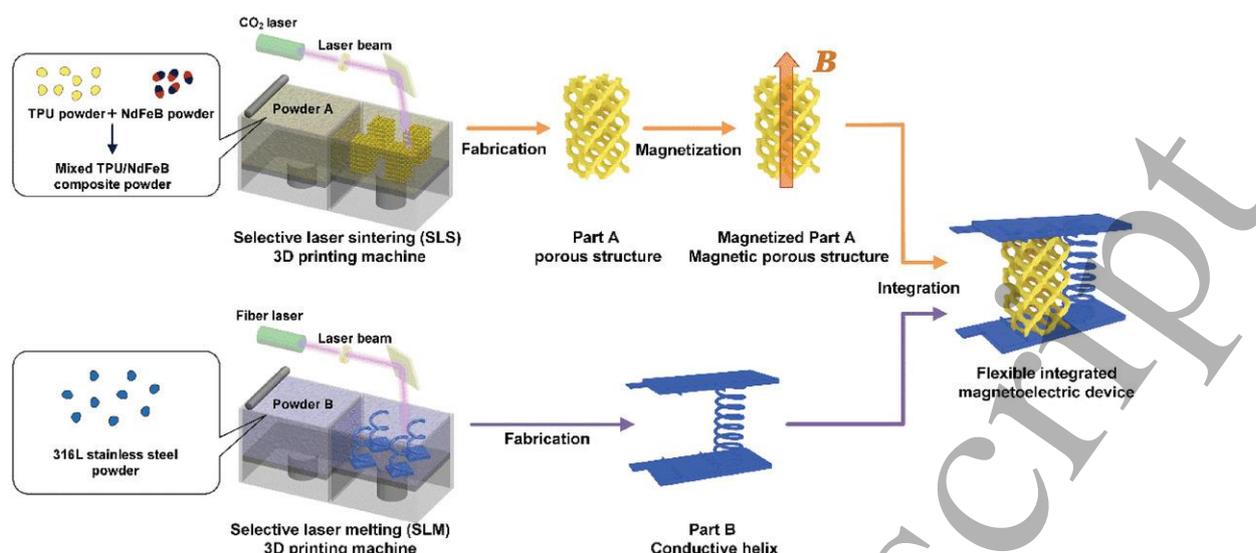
Schematic illustration of the fabrication process of the flexible integrated magnetoelectric device assembled by parts A and B. The part A, a porous structure, was fabricated by selective laser sintering (SLS) additive manufacturing (AM) process using TPU/NdFeB (where, TPU, thermoplastic polyurethane) composite powders and then was magnetized to acquire permanent magnetism. The part B, a helix structure with two flat plates, was fabricated by selective laser melting (SLM) AM process using 316L stainless steel powders. Reproduced from ref.6 with permission of WILEY-VCH Verlag GmbH & Co.
